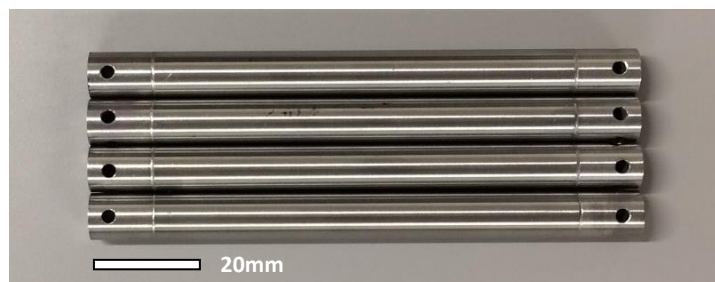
Tensile specimens with EB welded endcaps at both sides.
